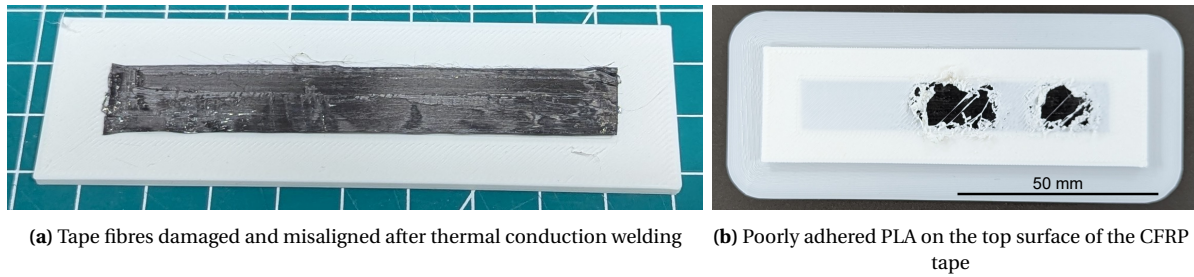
Initial welding tests using poly(lactic acid) (PLA) filament
